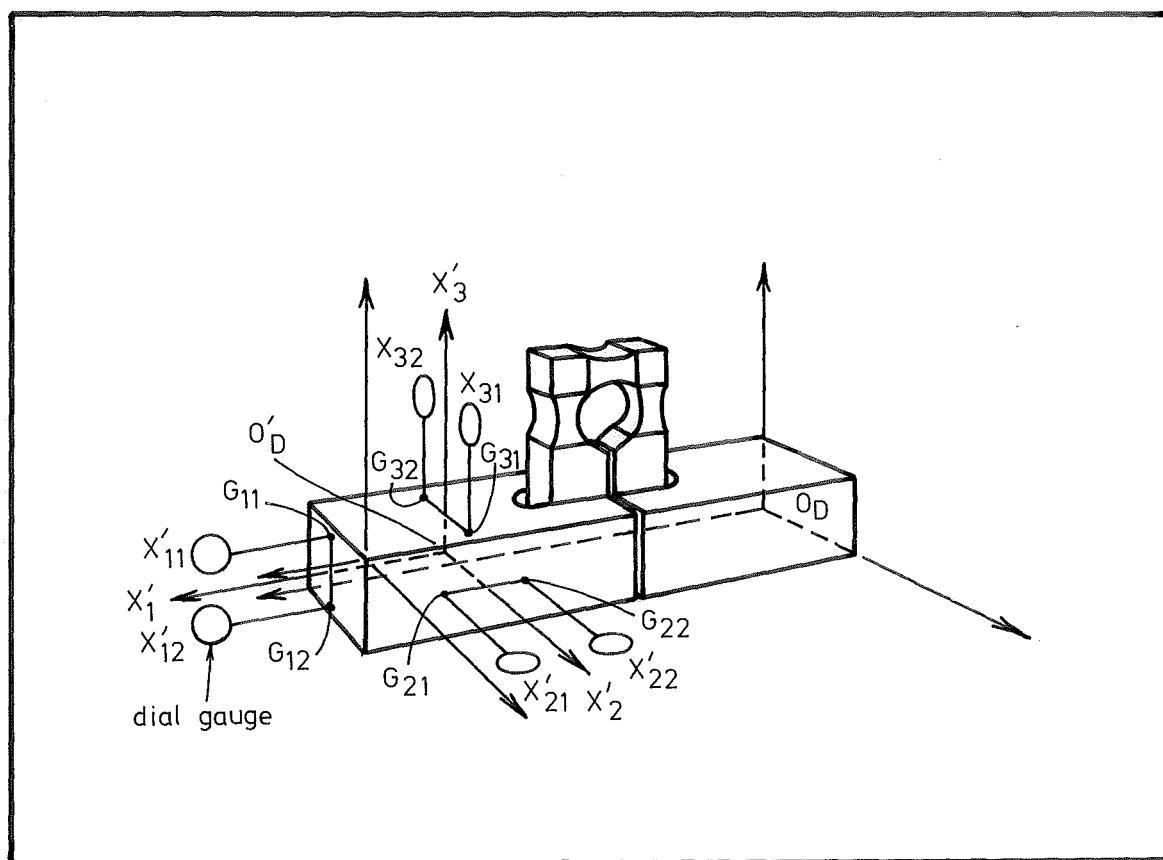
DIAL GAUGE ARRANGEMENT
